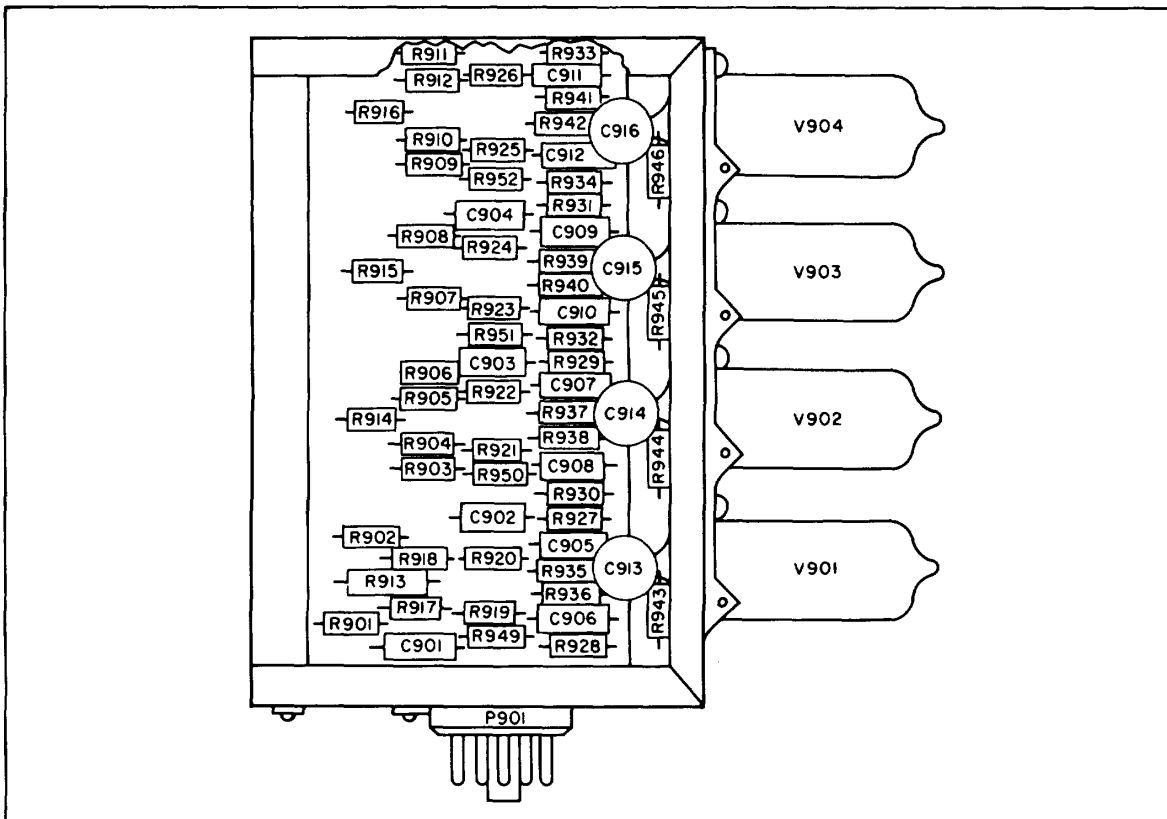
Right Side View of AC-4A Digital Display Indicator Showing Component Layout on Printed Circuit Board
